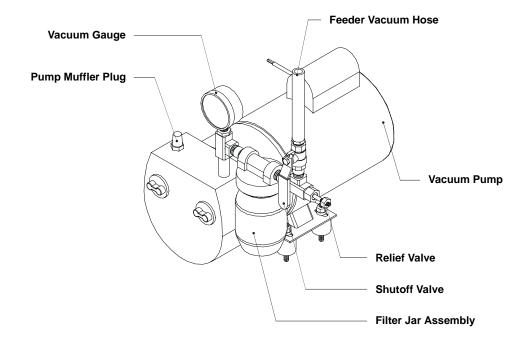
Feeder vacuum pump system illustrating vacuum relief valve, shutoff valve, filter jar assembly, vacuum gauge and hose location.
